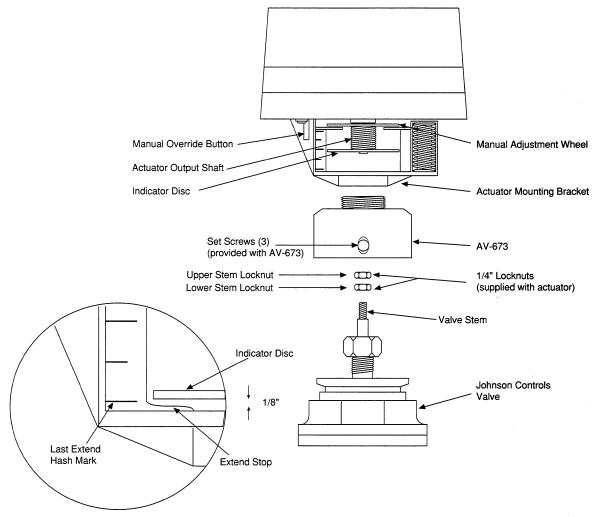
Exploded Assembly View of MF-631X3 Actuator to Johnson Controls Valve.
